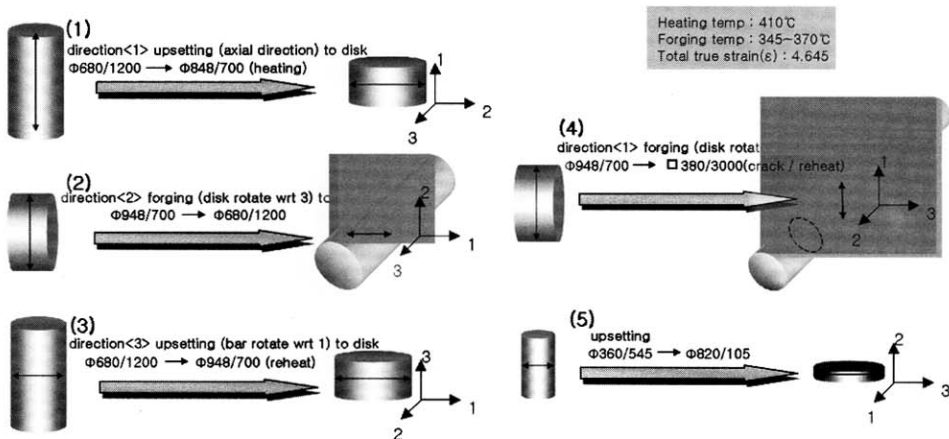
Schematic drawing of billet making sequence of multi-axial forging (MF).
